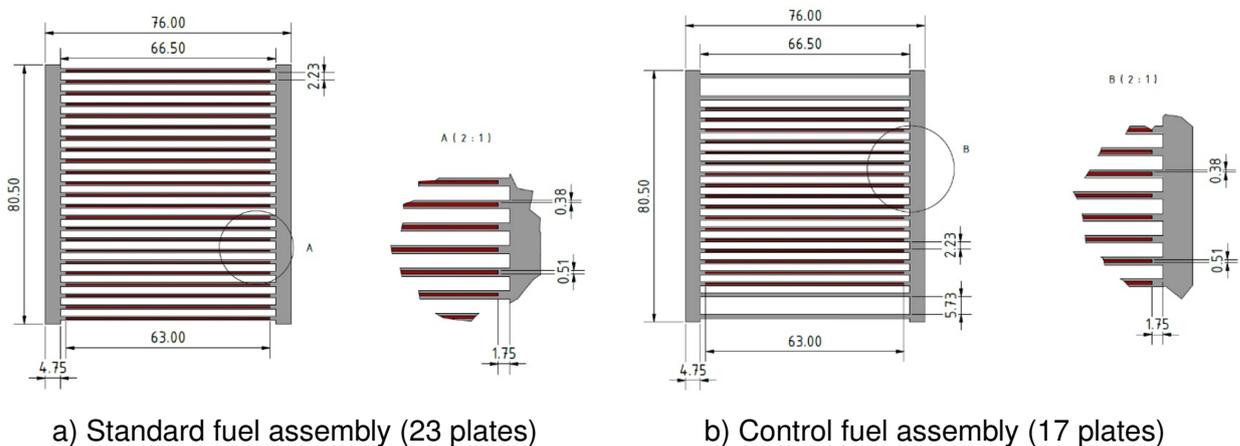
Standard and Control Fuel Assemblies, dimensions mm
